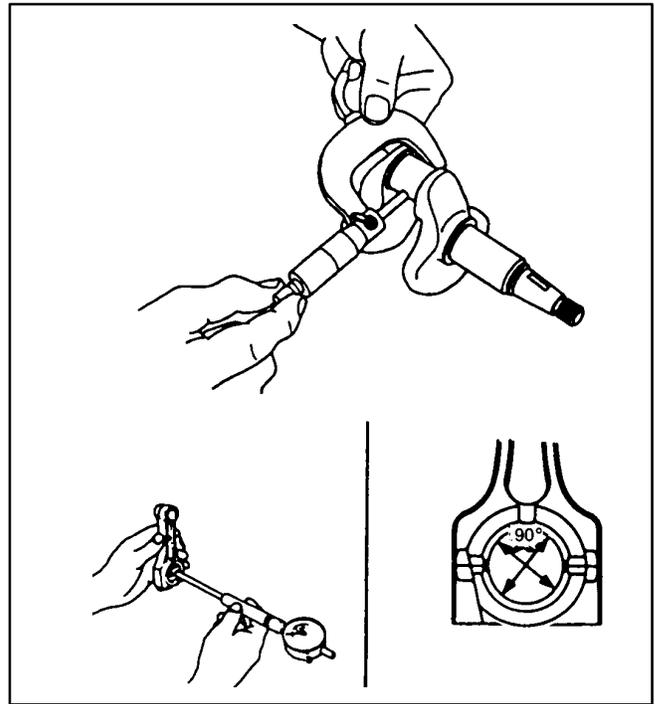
CRANK PIN AND CONNECTING ROD CLEARANCE
